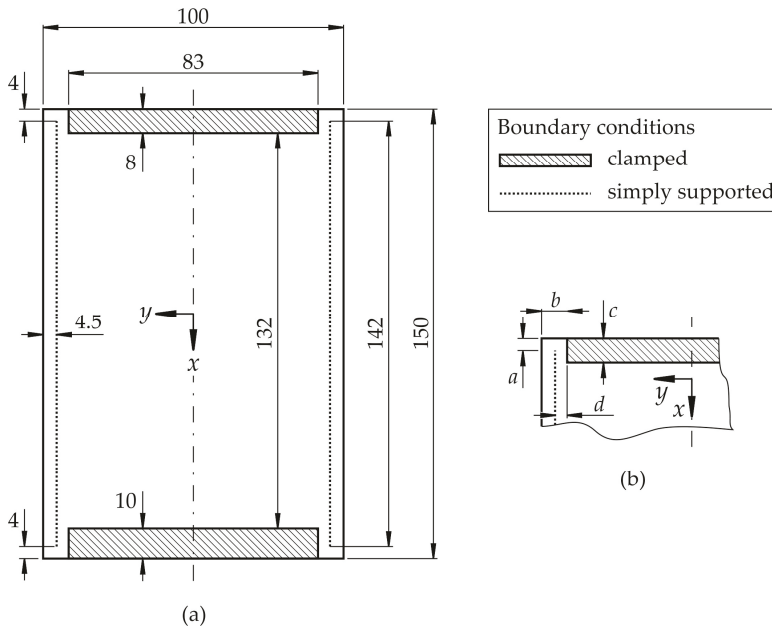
(a) Schematic fixture of composite plate (nominal dimension 100 mm × 150 mm) within typical CAI-standard test devices (cp. e.g., standards [1,5]) and (b) modified upper corner of CAI test device.
